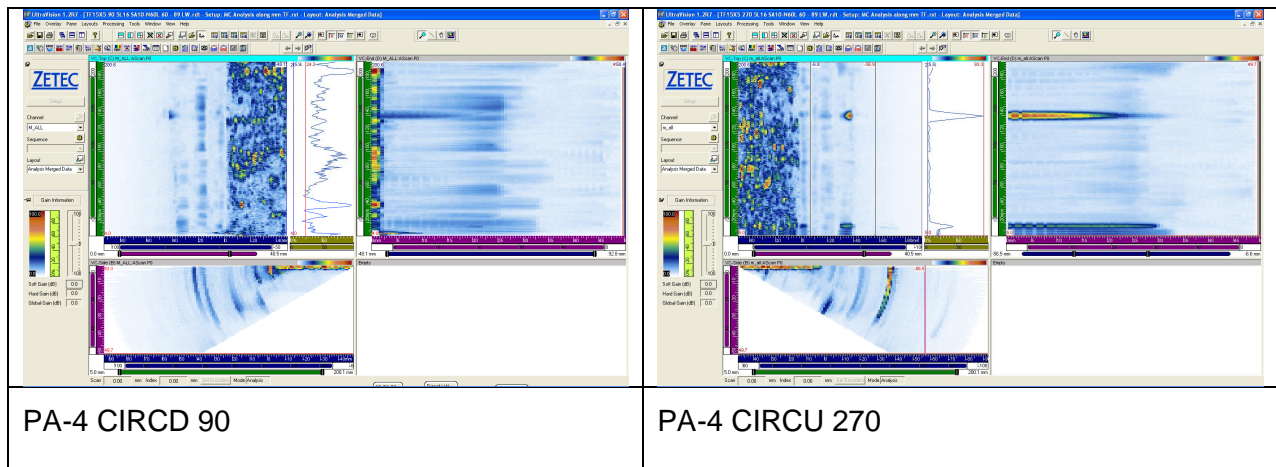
General views of weld TF scanned with technique PA-4.
